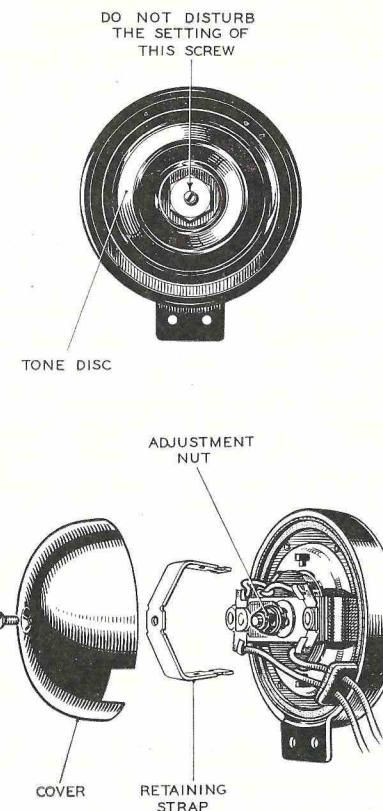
Model HF1849 Horn with Rear Cover removed for Contact Breaker adjustment
